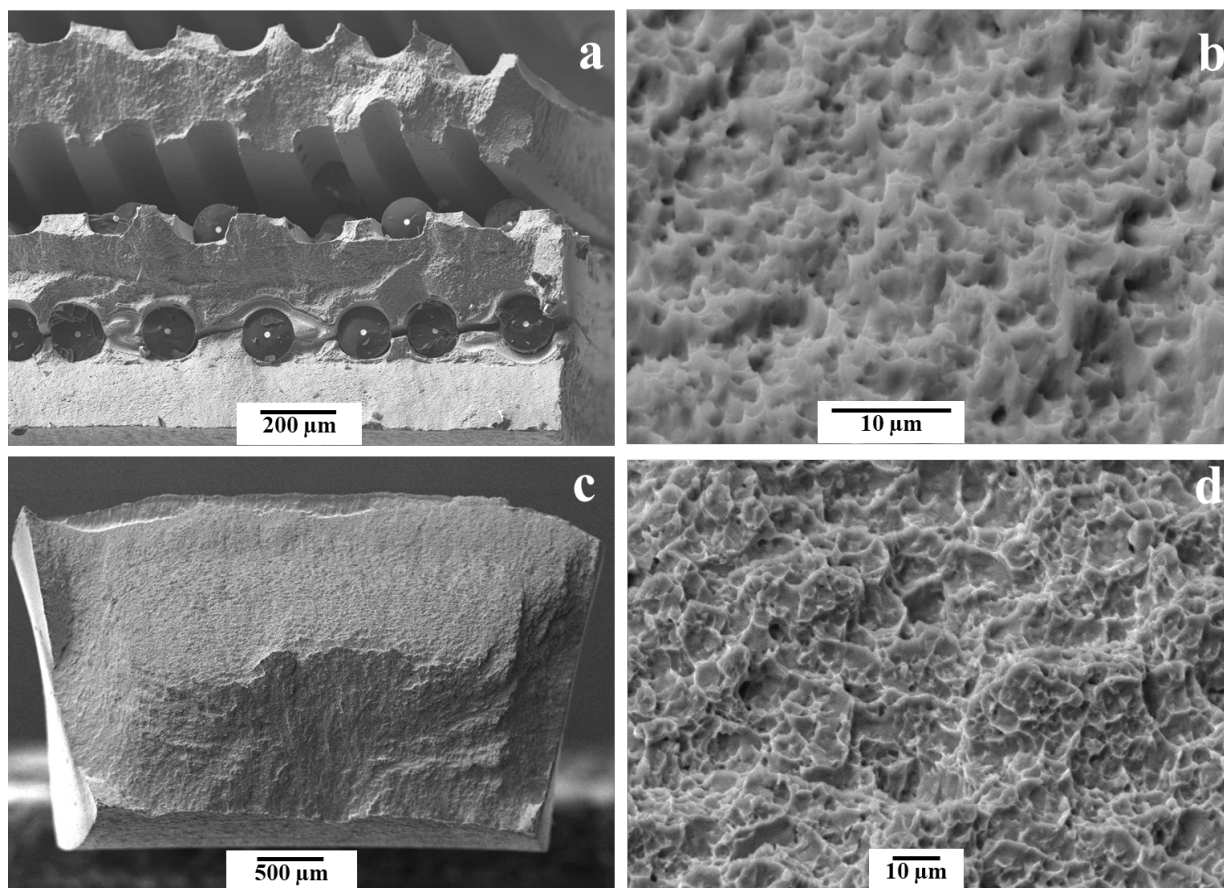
Fracture surface of samples after impact bending tests:
